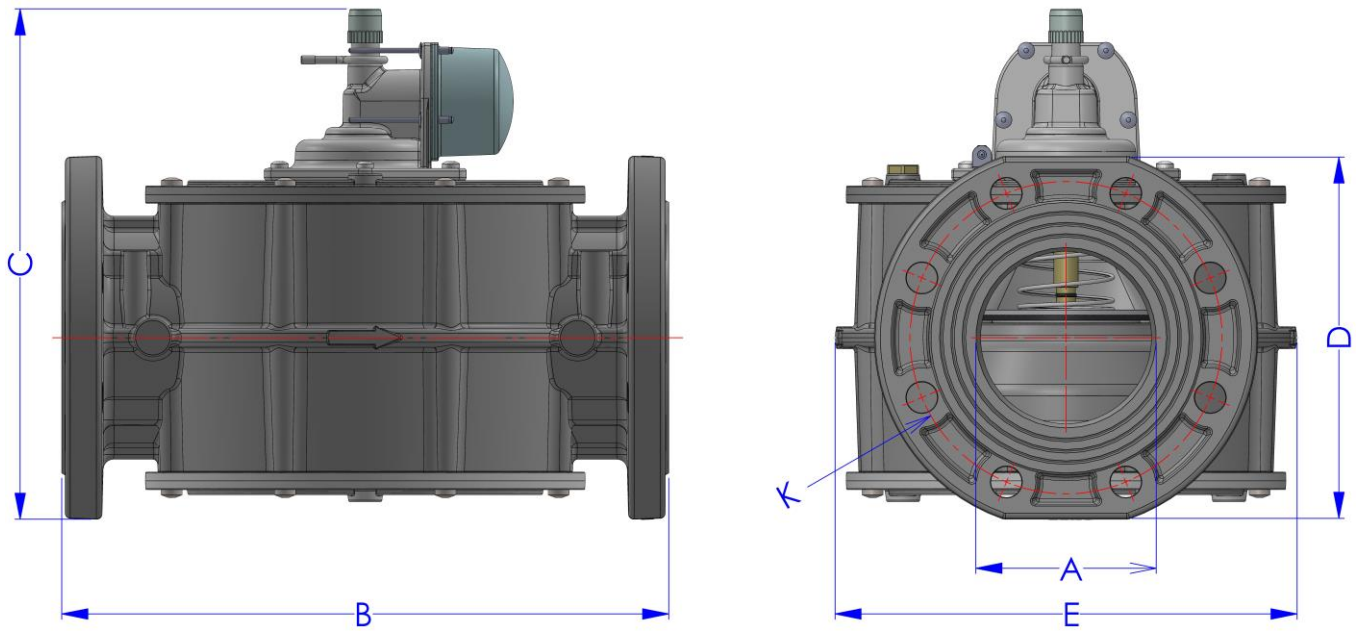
EMV Technical Dimensions (DN 25 – DN 50)
